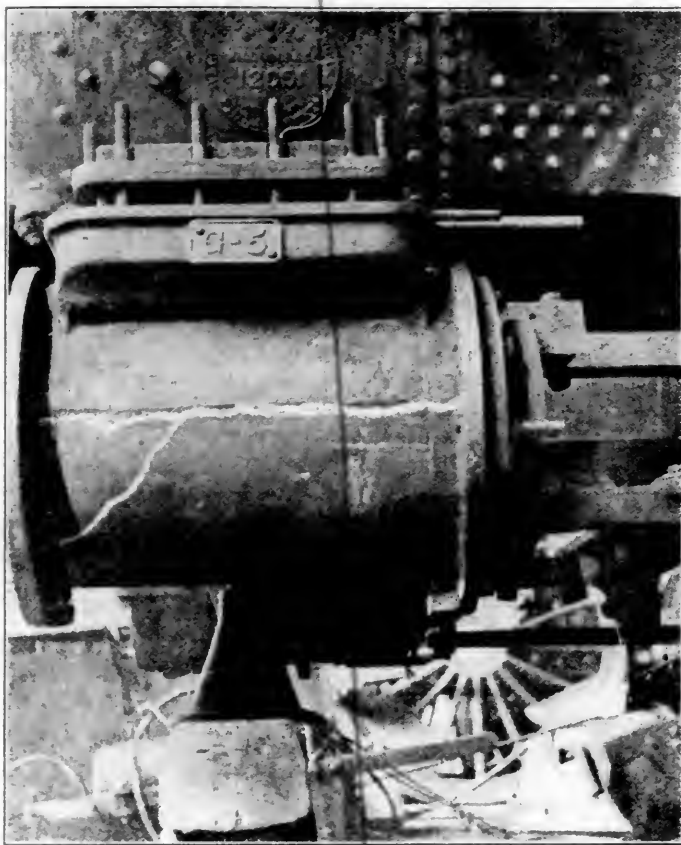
Cracked Cylinder Repaired by an Oxy-Acetylene Weld
